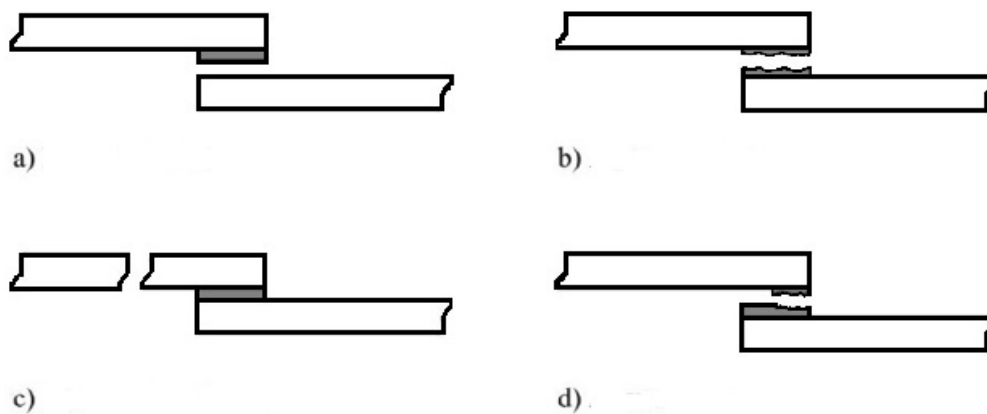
Possible failure modes in bonded joints: adhesive failure (a), cohesive failure (b), adherend failure (c) and mixed failure (d) [6]
